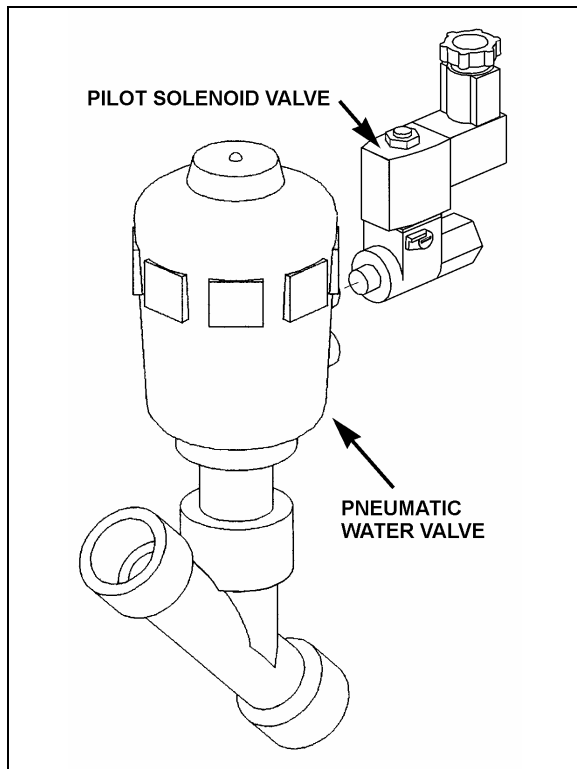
CENTRAL HOT WATER PNEUMATIC VALVE ASSEMBLY
